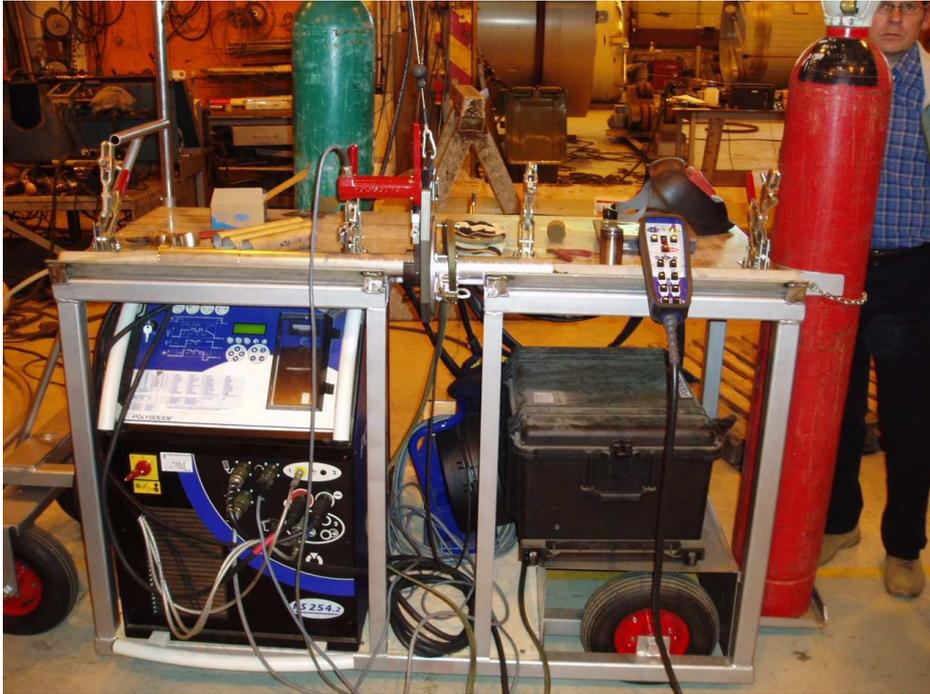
Tailor made movable joining station for stainless tubes with open welding head. (H.Salkinoja, courtesy of Tankki Oy)
